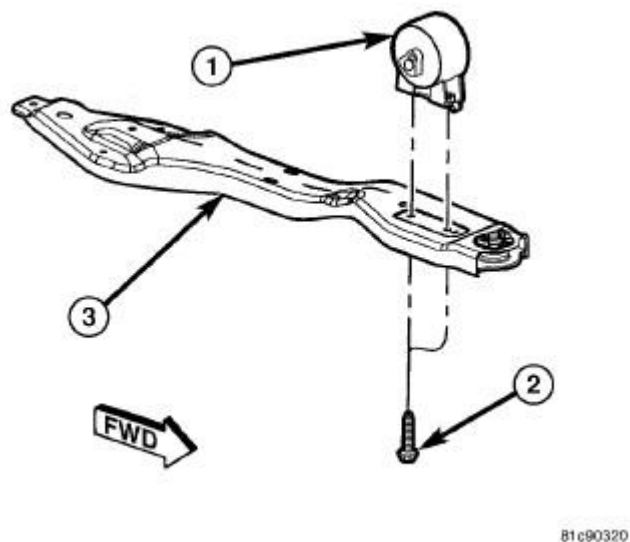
Removing/Installing Front Engine Mount Mounting Bolts
